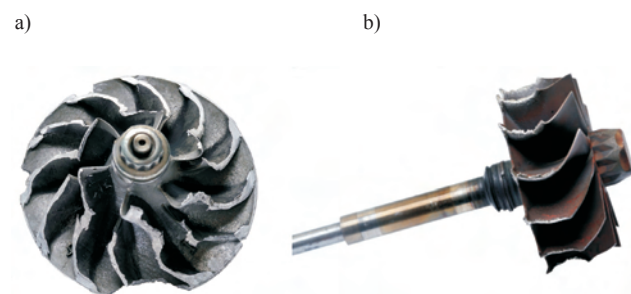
Damaged air compressor wheel after hitting: a) the shroud, b) the iron housing caused by increased bearing play [5]
